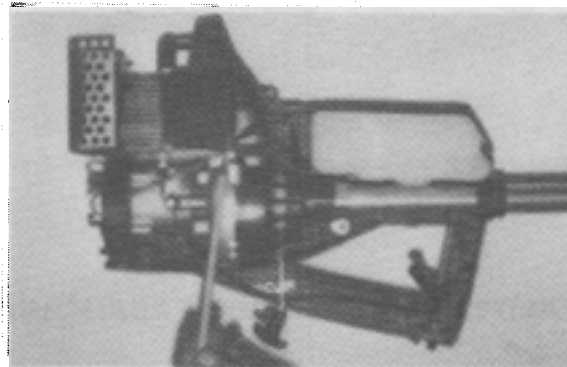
With the left side removed proceed to lift from the housing handle area, the switch and lead assembly, the throttle lever and spring, and the throttle wire housing. Also loosen the fuel line from the retaining groove in the starter housing.
